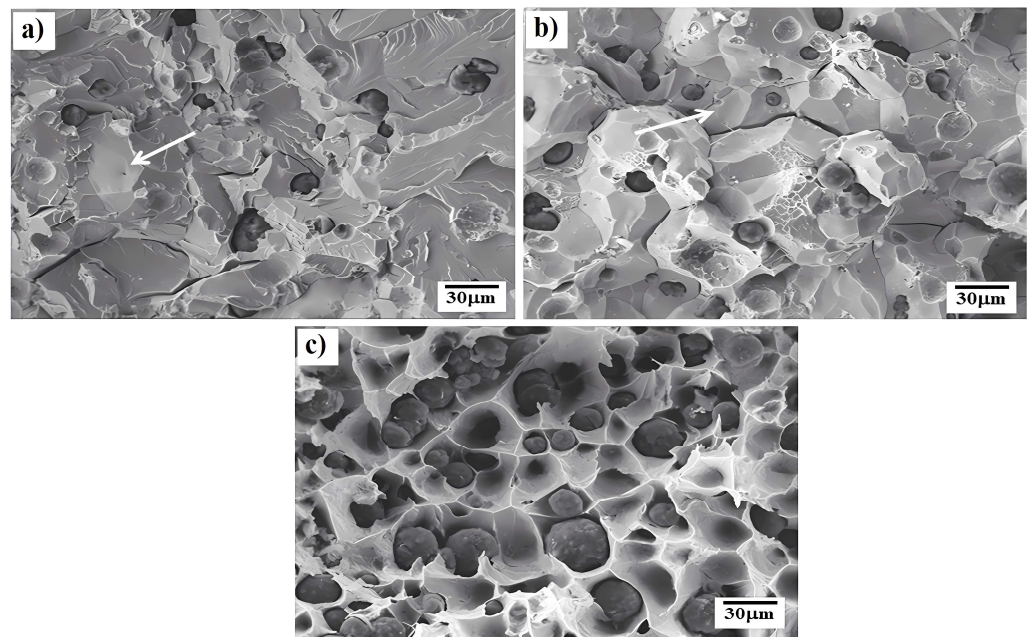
The different kinds of fracture that were found on the fracture surface in spheroidal cast iron: (a) cleavage fracture at RT, (b) intergranular fracture at 475 °C, and (c) ductile fracture at 650 °C. The black spheres are spheroidised iron carbides. Specimens were machined after casting and tested at temperatures in the range RT to 650 °C at a strain rate of $3 \times 10^{-4} \text{ s}^{-1}$. Composition of the cast iron was 3% C, 5% Si, and 0.038% Mg, adapted with permission from [25], 2023, Elsevier.
